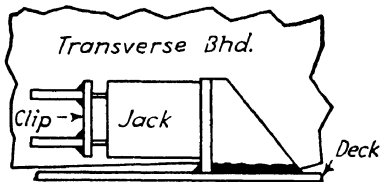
Hydraulic jack used to push transverse bulkhead on the center line of the ship.
